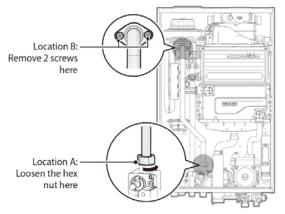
Detaching Gas Inlet Pipe from Gas Valve and Fan Motor Assembly (NCB-24/28/34LSWE)
